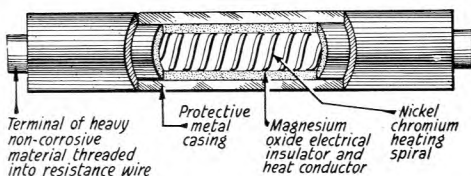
SECTIONAL VIEW OF HOTPOINT TORRIBAR IMMERSION HEATER.
